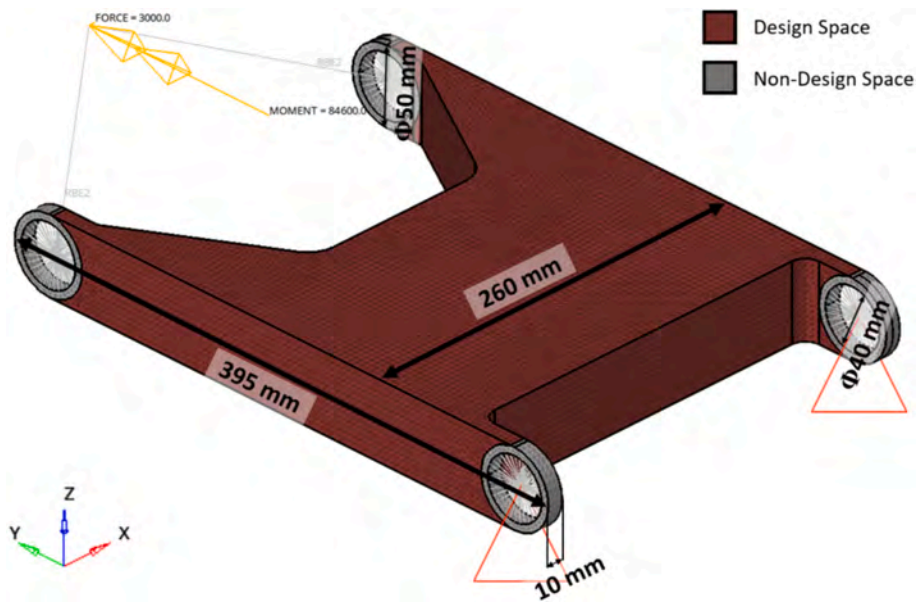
SS316L automotive lower control arm initial design space, with constraints and loads.
